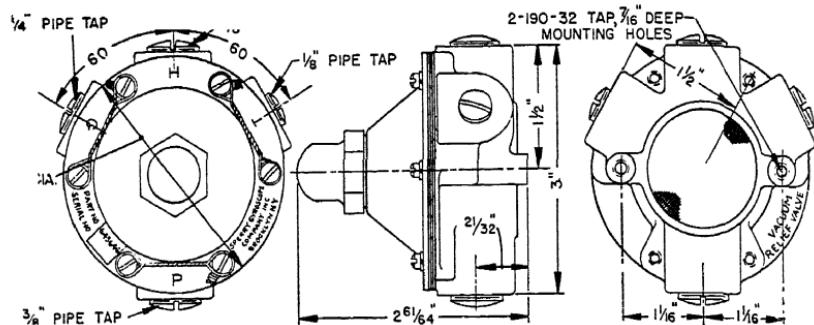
Principal Dimensions of the Vacuum Relief Valve
